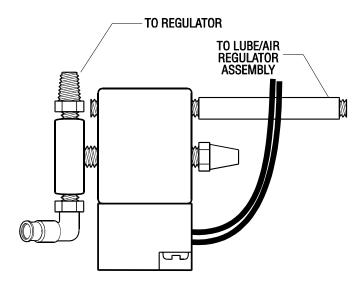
Top view of spindle lube/air solenoid assembly.
